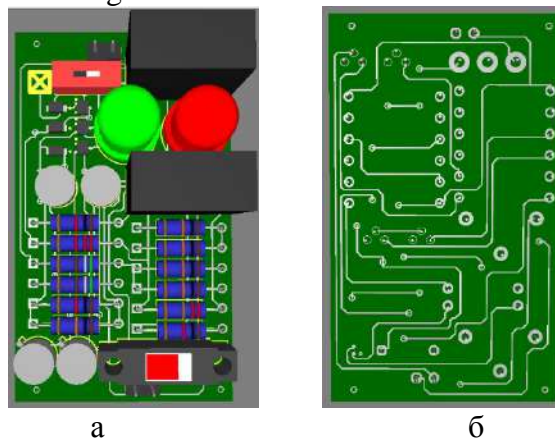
3D model of the voltage converter board with indication elements, a - top view, b - bottom view
